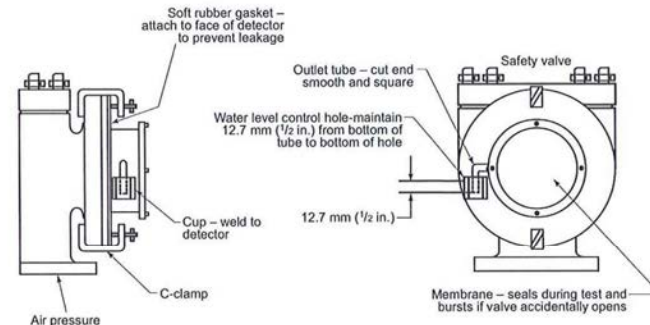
Device to Relieve Body Pressure Caused by Accidental Popping of the Valve
